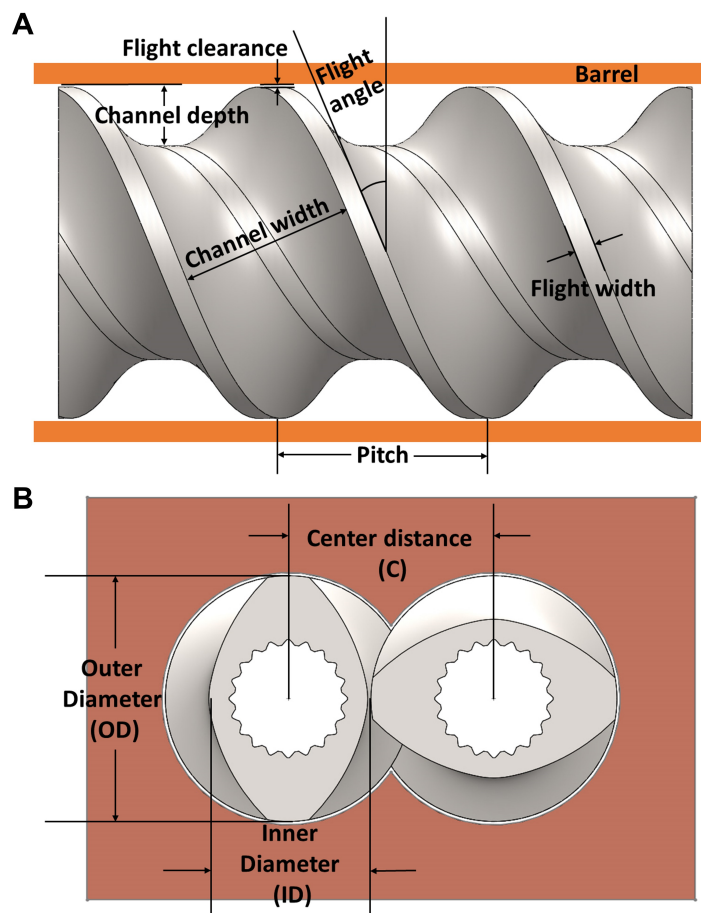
Screw geometry of: A conveying element; and, B twin-screw extruder (TSE) cross section view
